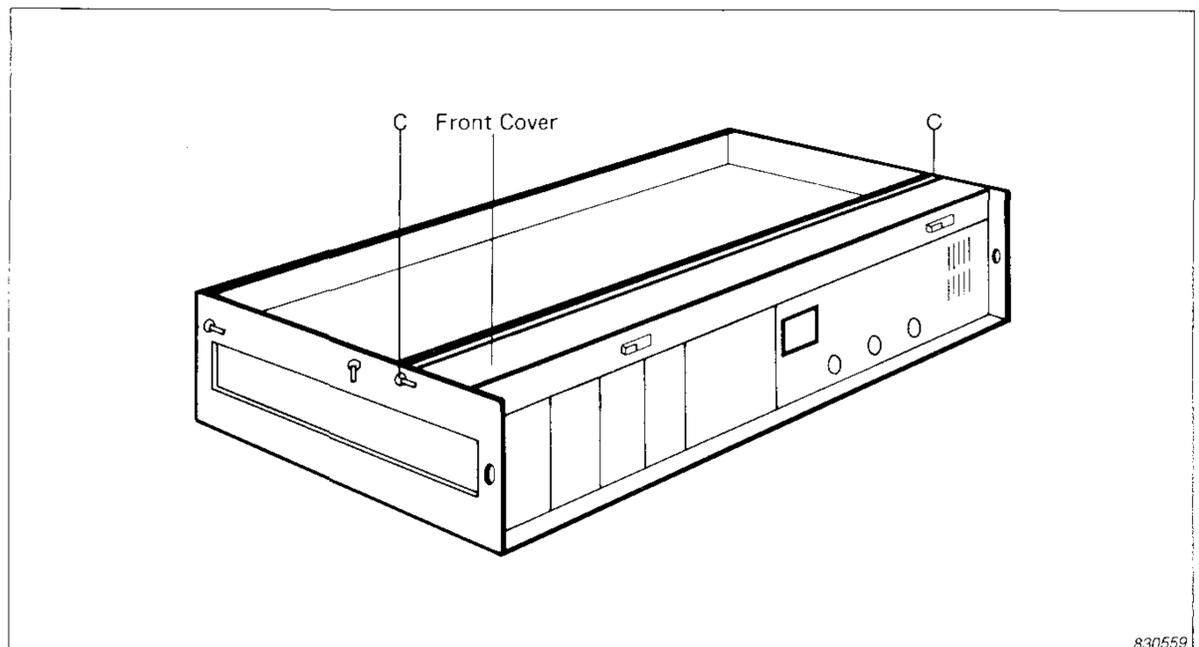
Chassis of the Tape Recorder Type 7005 showing the screws which secure the front cover
